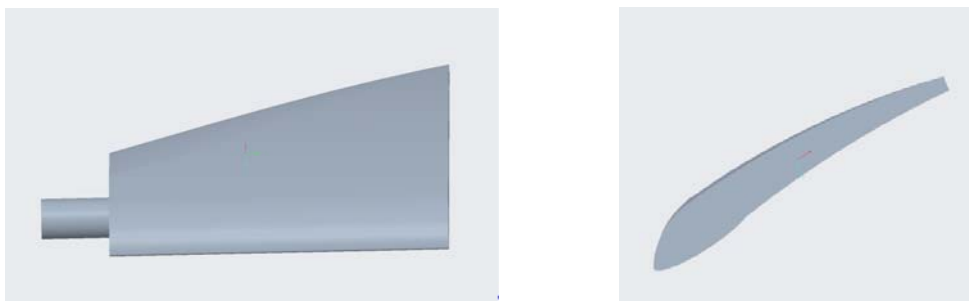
Blade design by Solidworks and manufactured by rapid prototype 3-D printer
